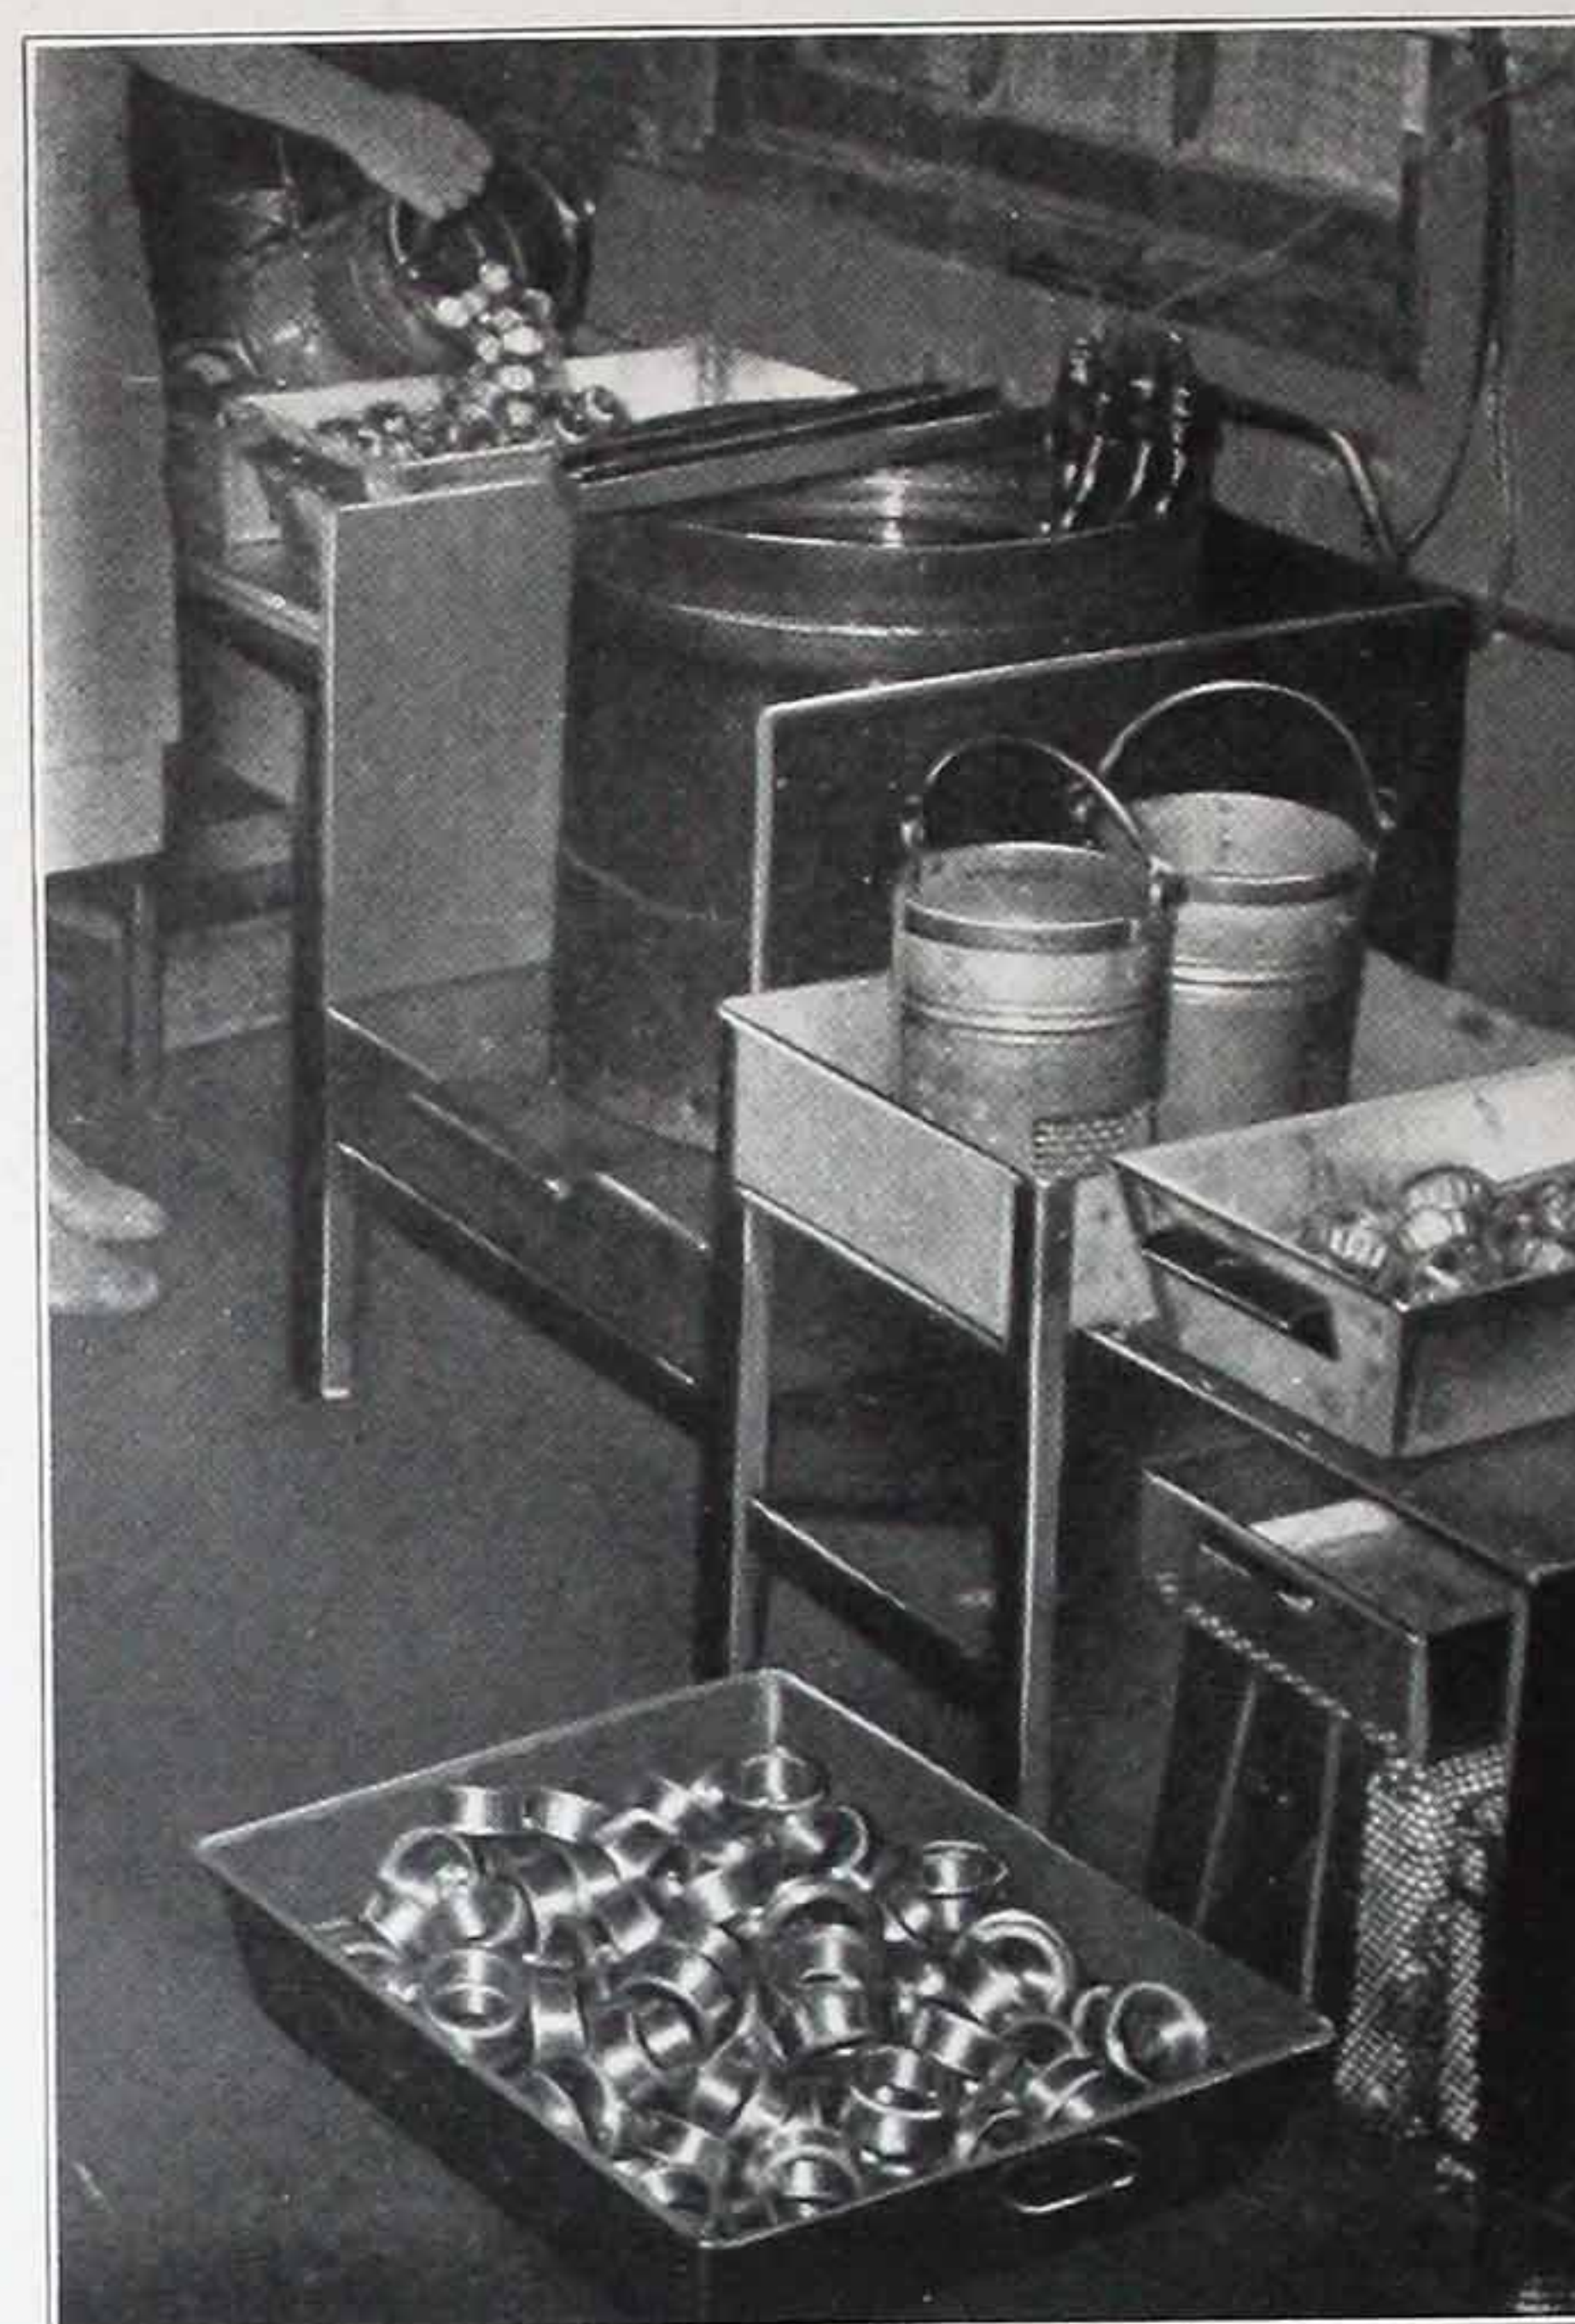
Roller bearing parts being dipped in melted rust preventive to secure complete coverage with an economical film.
